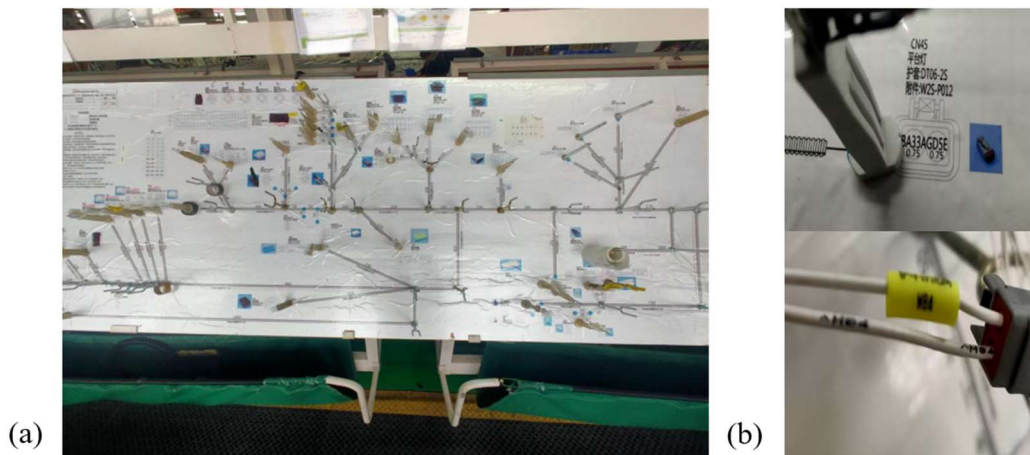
(a) Assembly Engineering Workbench; (b) Connector Markings and Wire Markings
